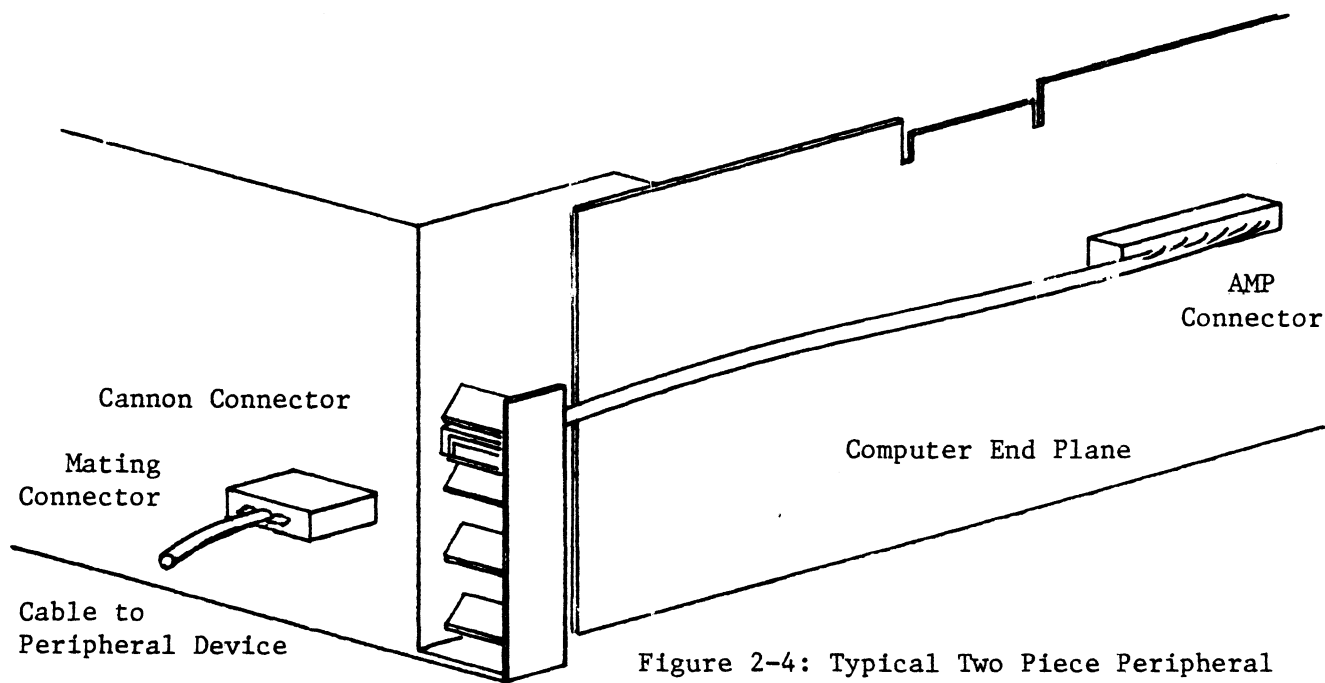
Typical Two Piece Peripheral Cable Assembly
